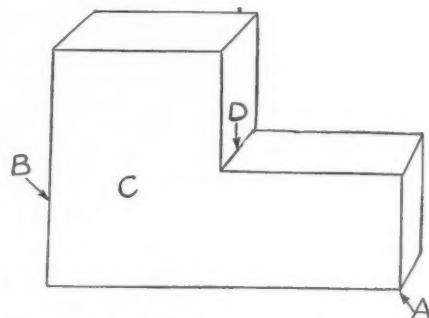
Shape of uniform thickness which will not cool uniformly
